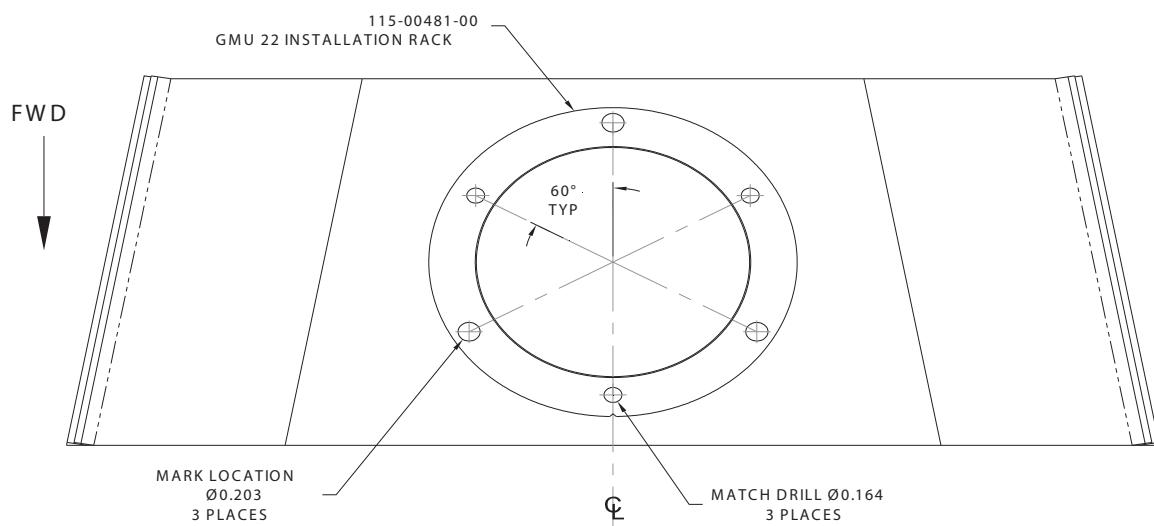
Magnetometer Shelf With Hole Pattern For GMU 22 Installation Rack
